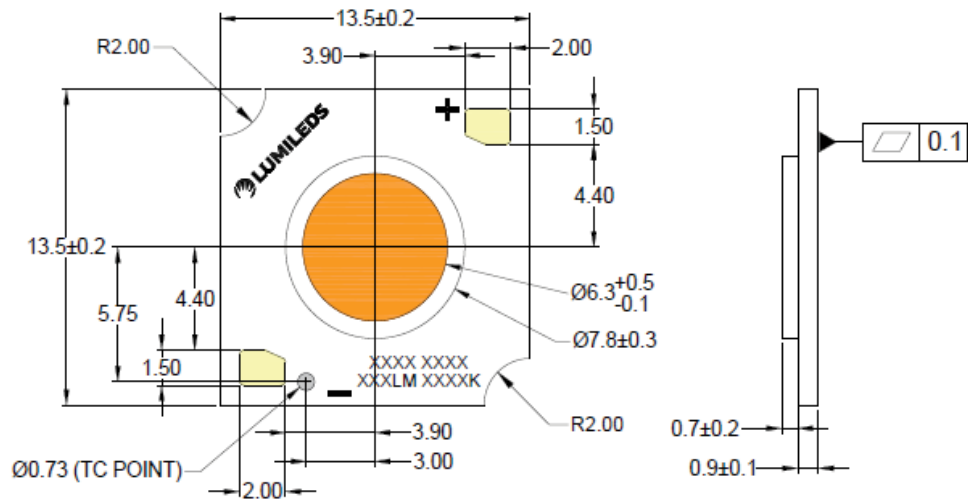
Mechanical dimensions for L2C6-xxxxxL02x0600.
